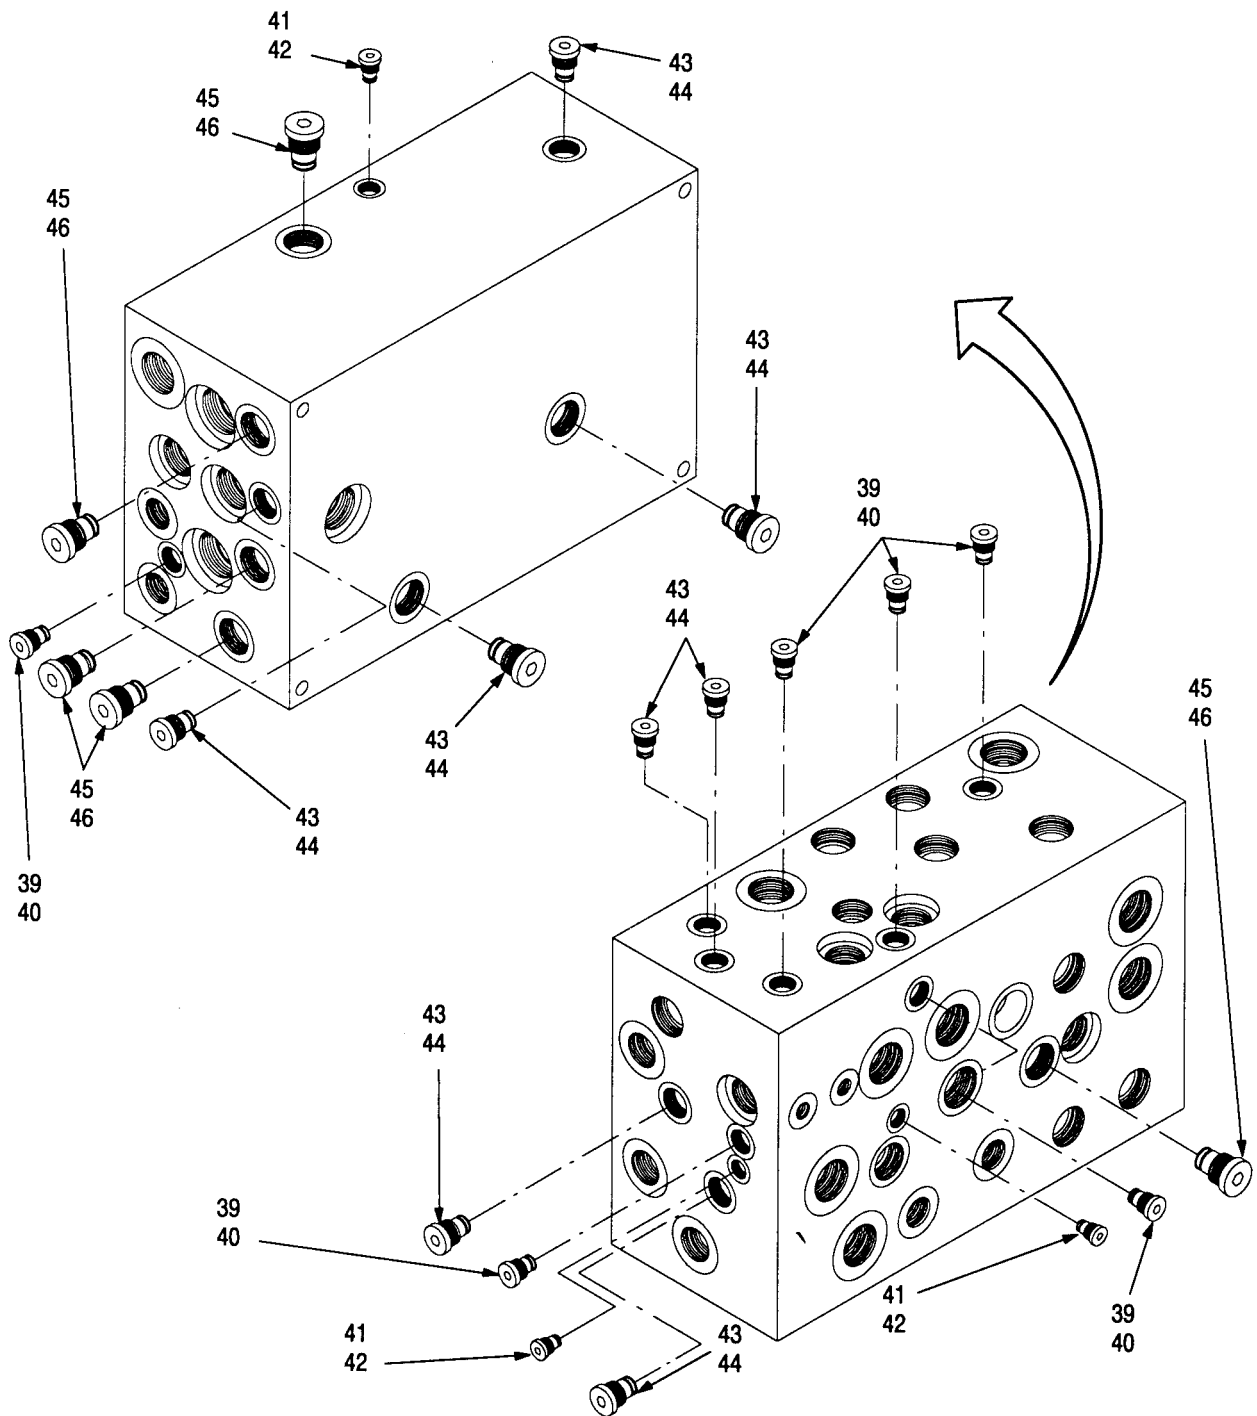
Hydraulic Manifold Replacement (Sheet 1 of 2)
